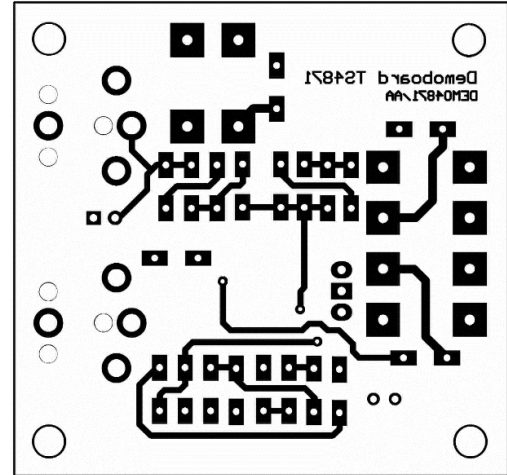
SO8 and MiniSO8 demoboard bottom solder layer
